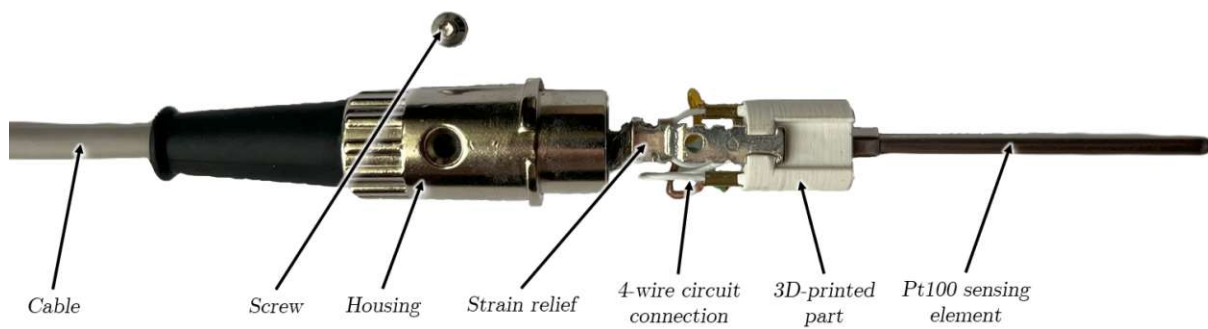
Disassembled new sensor with a Pt100 sensing element with an increased diameter section. For assembly, the entire package is inserted into the housing and then secured with the screw.
